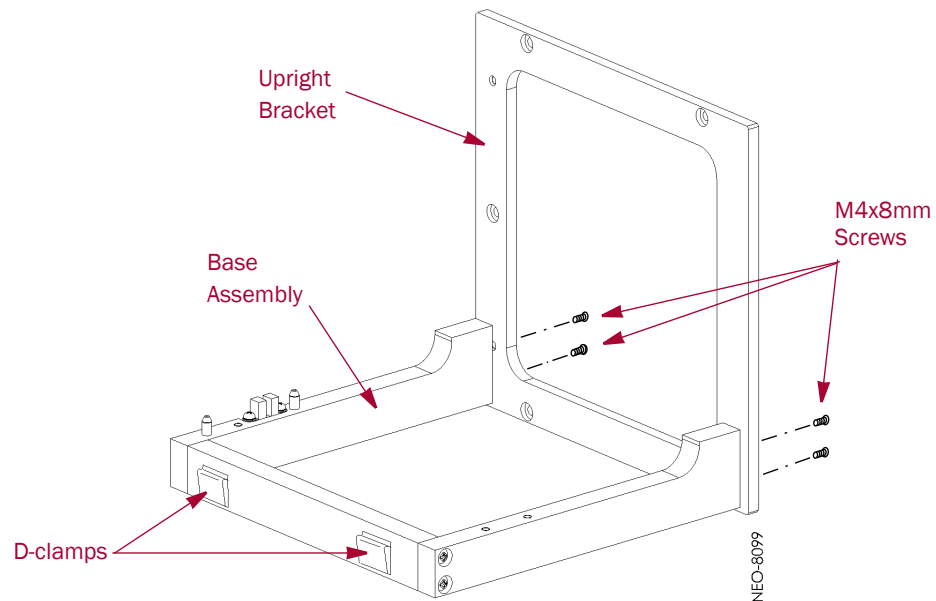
Mounting Bracket Assembly for HRA (D-clamps Attached)
